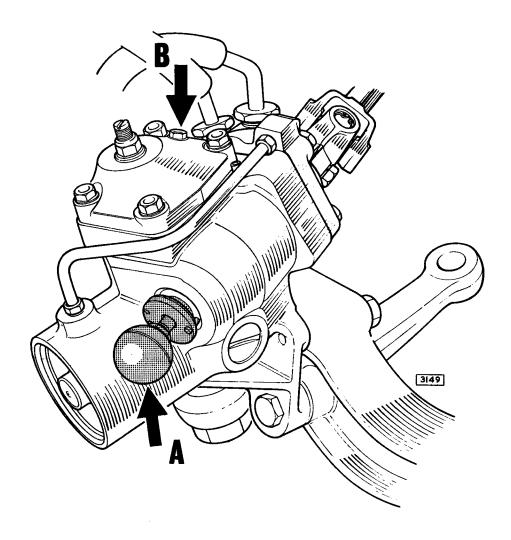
Centralising the steering gear. Insert the special centralising gauge "A" so that the two pins engage with the two holes in the casting and the tongues engage with the slots in the wormshaft. "B" indicates bleed screw.
